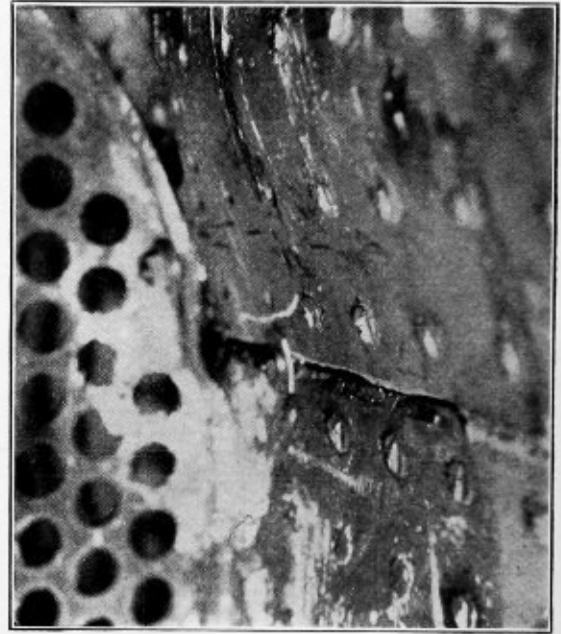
UNFINISHED WELD, SHOWING HOW THE SHEETS ARE BEVELED AND CLAMPED TOGETHER AT THE SEAM
